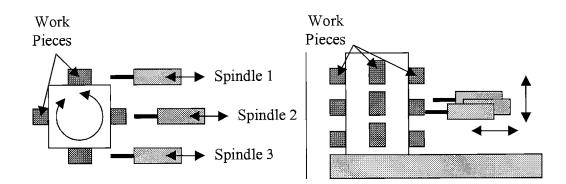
A SCHEMATIC VIEW ON THE INSIDE OF A MACHIING CENTER (TOP VIEW: LEFT, SIDE VIEW: RIGHT)
